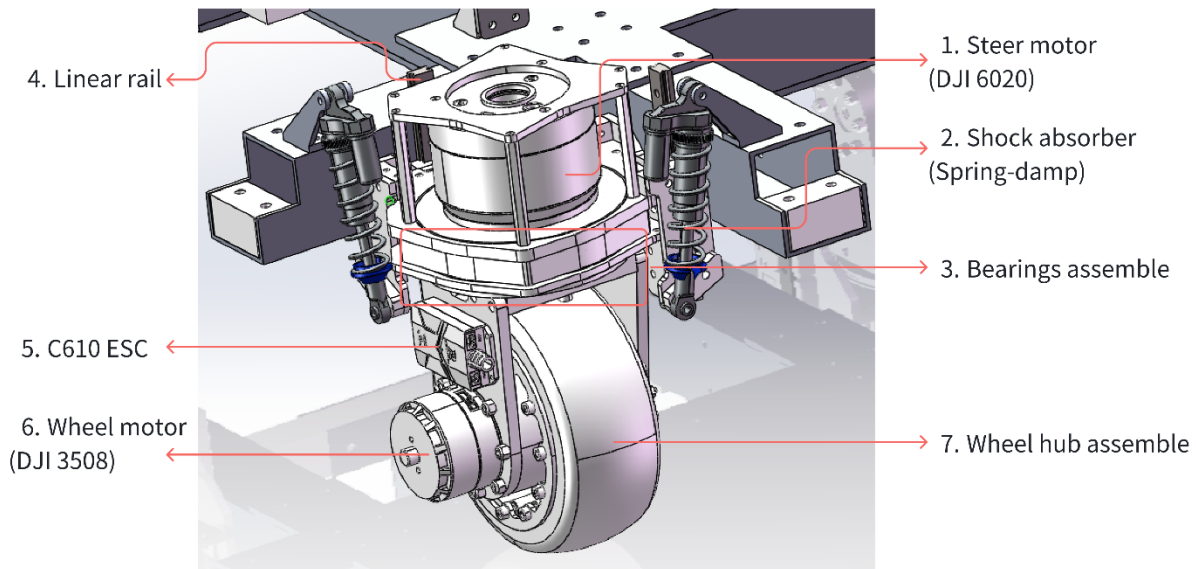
Steering wheel overview in SolidWorks
